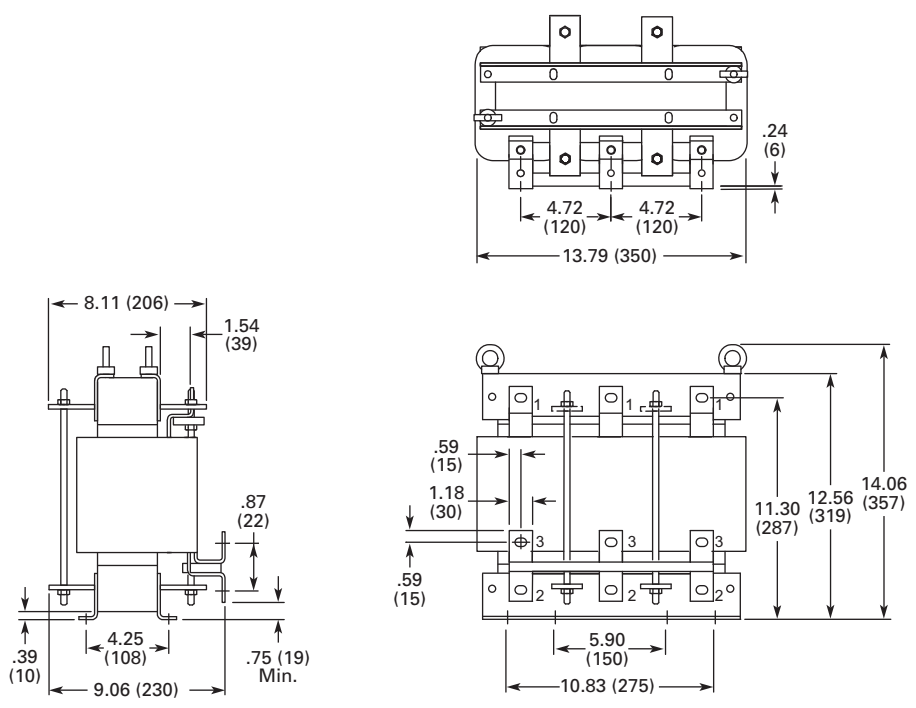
Dimensions of AC Choke CHK0261 in Inches (mm)
